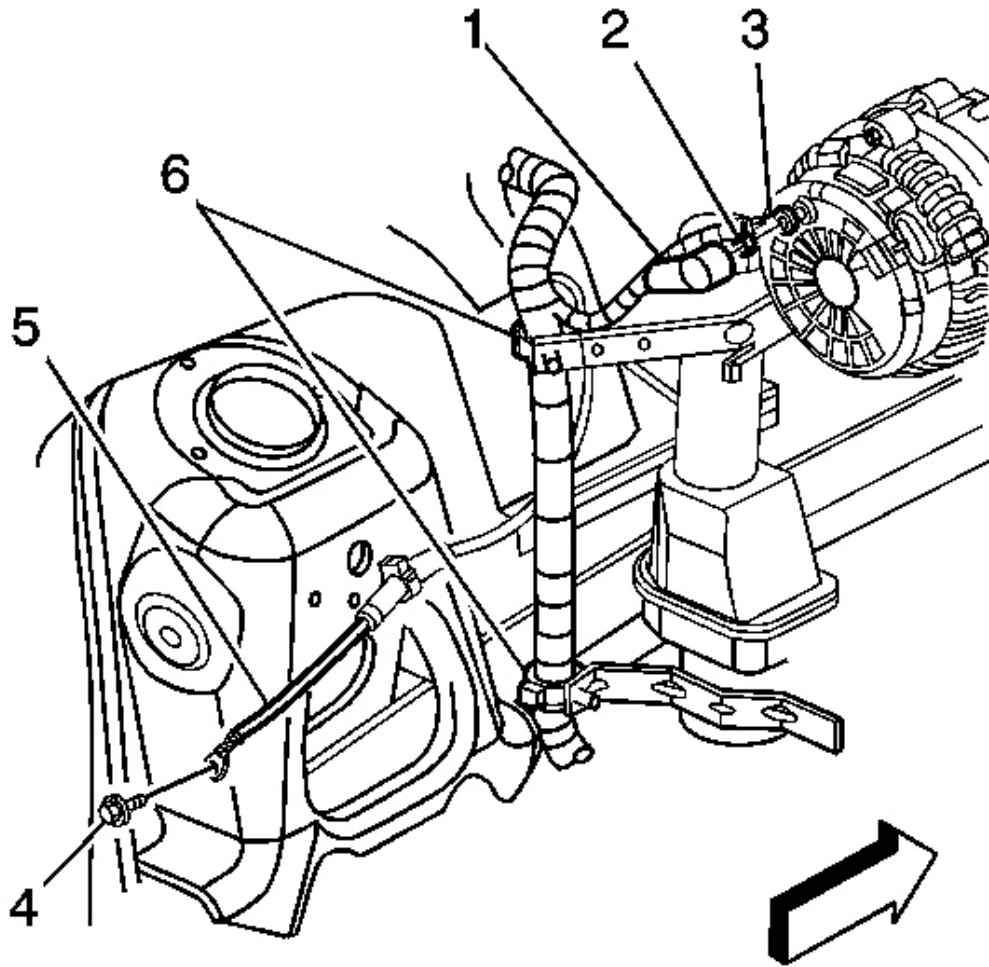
View Of Generator Cable Boot, Head, Nut & Bolt
